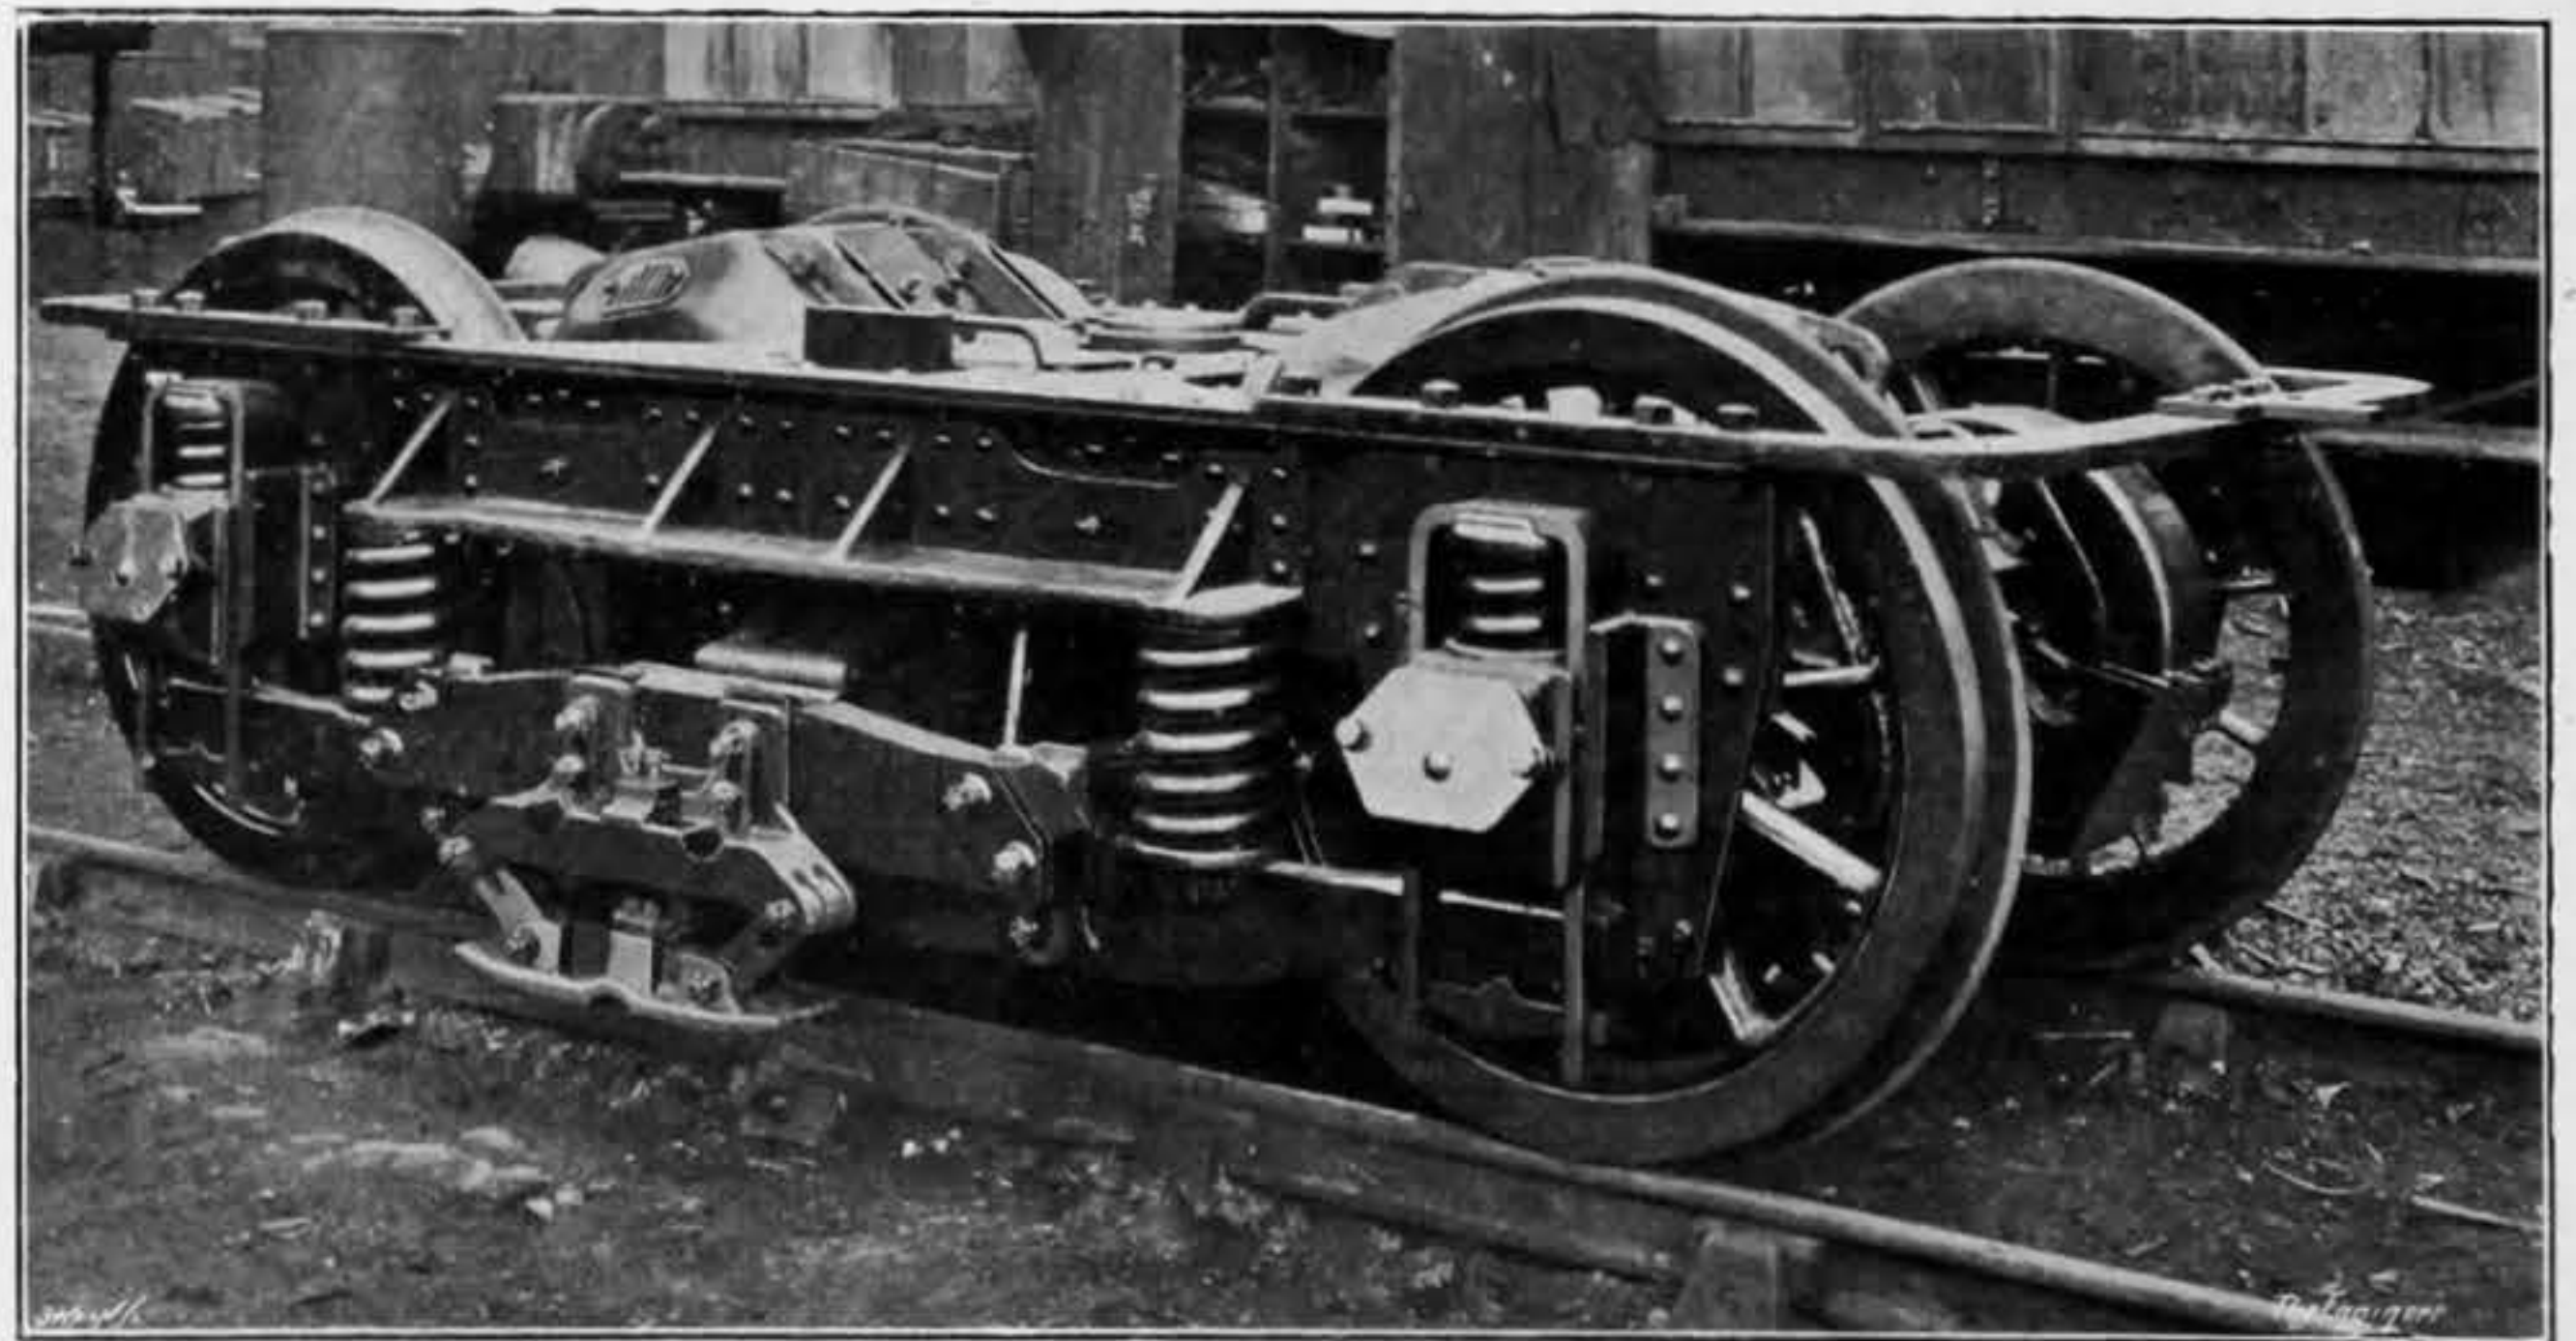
EIGHT-WHEEL MOTOR BOGEY
